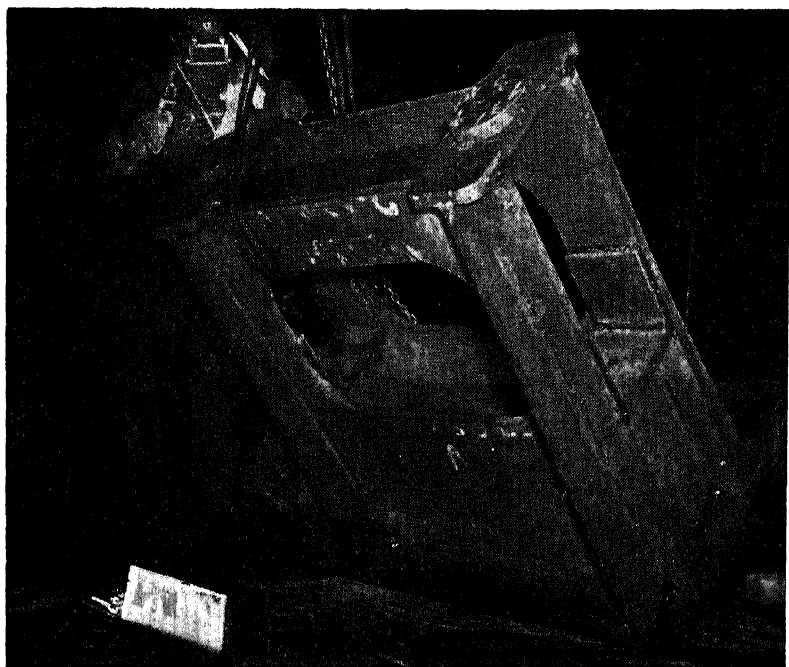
Fabricating a pinch roll housing built from flame cut $1\frac{1}{4}$ -in. plate with mild steel shielded arc electrode.
